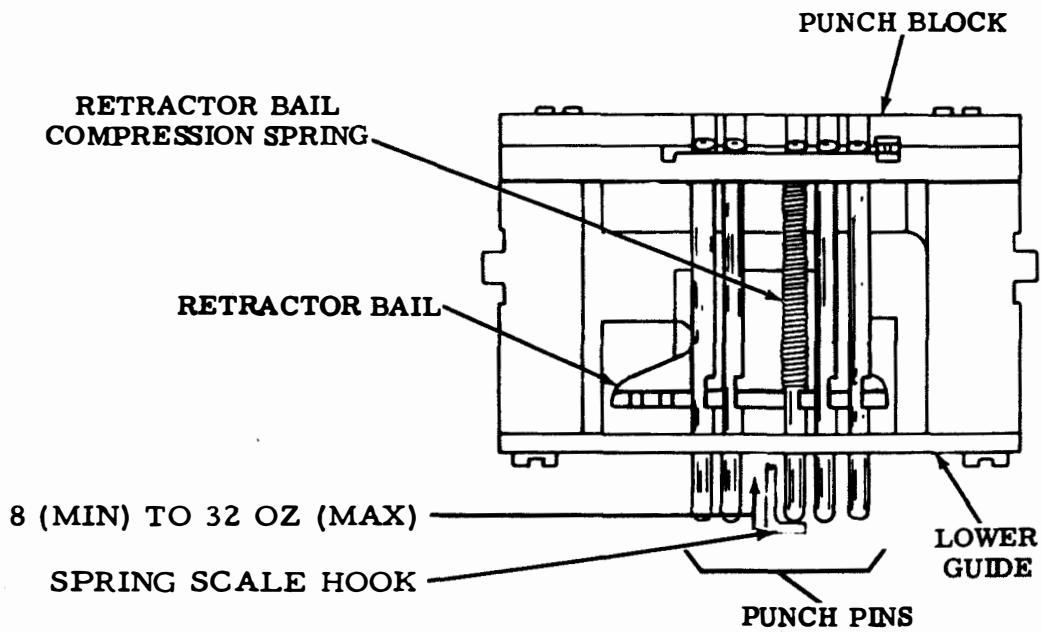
Retractor Bail Compression Spring for Chadless Tape - Left Side View
